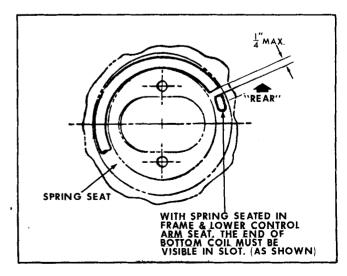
Coil Spring Position In Lower Control Arm Spring Seat
